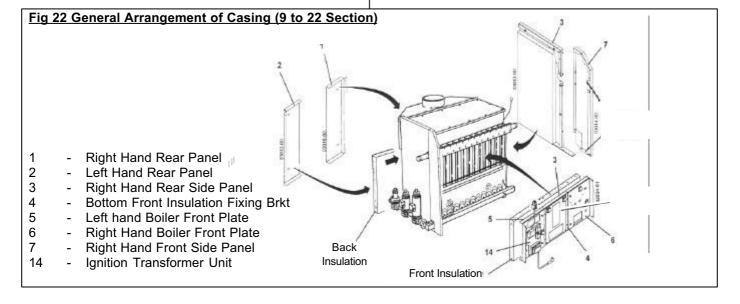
General Arrangement of Casing (9 to 22 Section)
